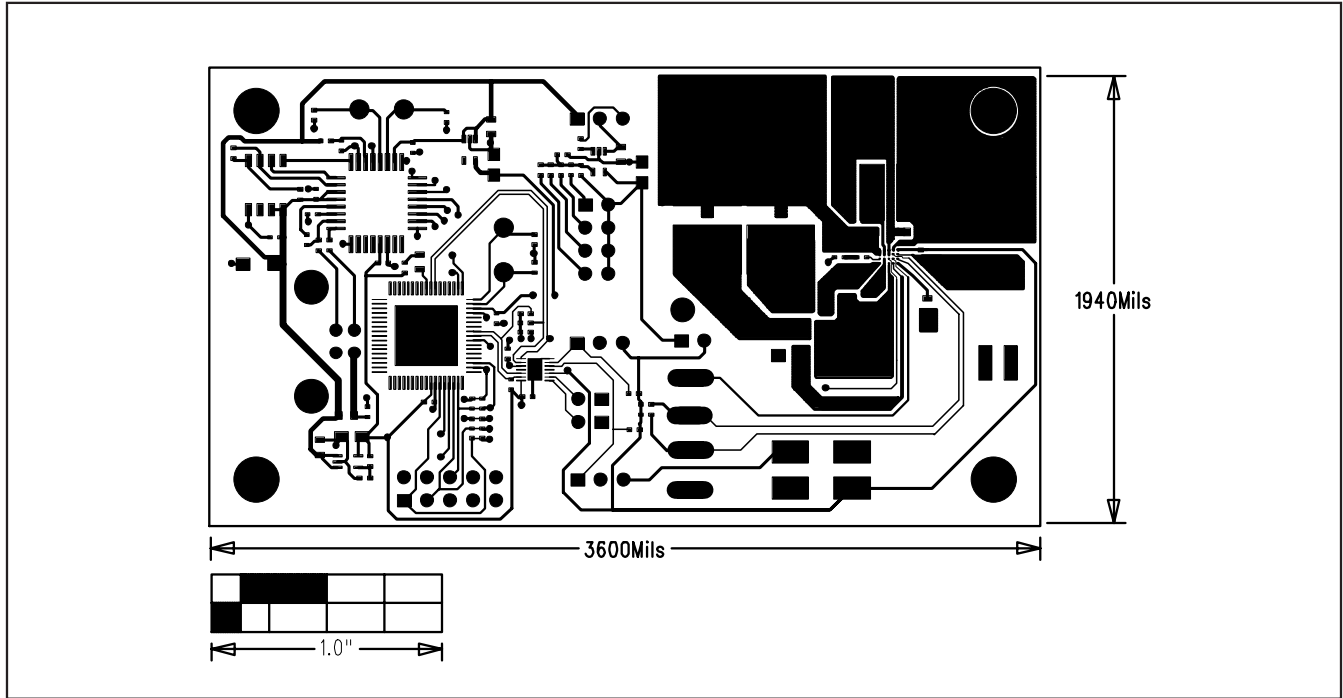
MAX8834Y EV Kit PCB Layout—Top Layer
